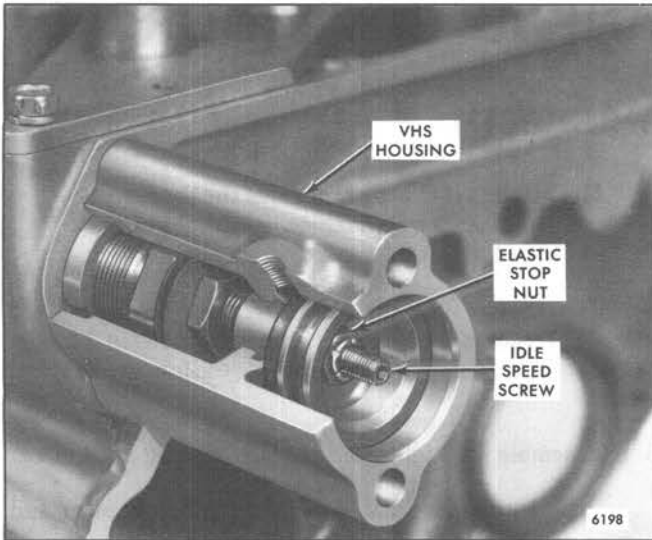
Adjust Elastic Stop Nut using Tool J 28598-A
